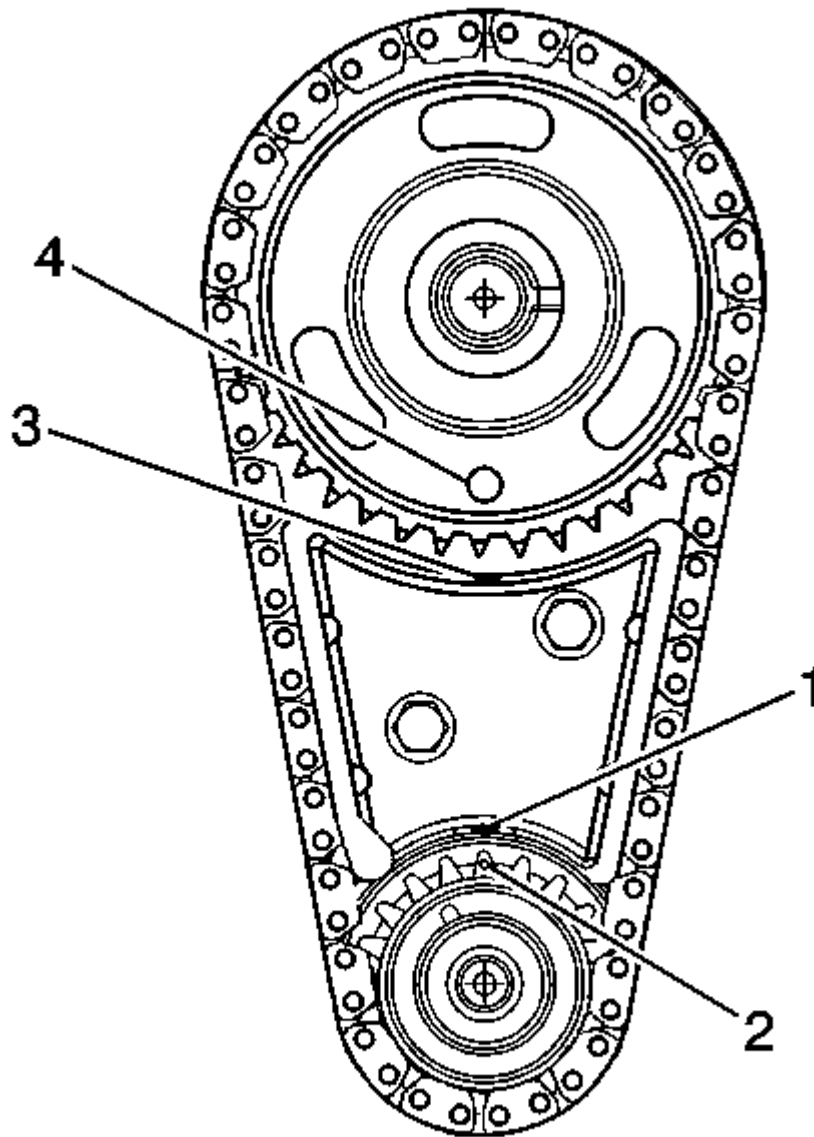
Aligning Dowel In Camshaft With Dowel Hole In Camshaft Sprocket
